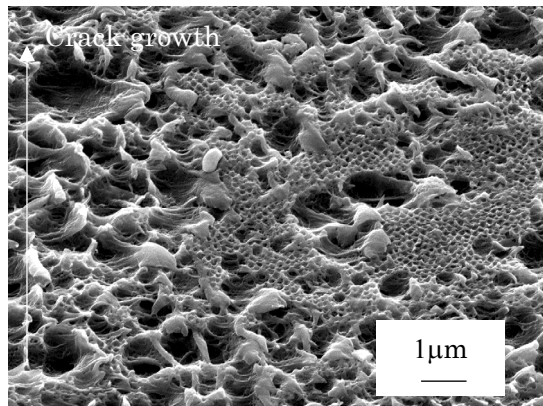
Fracture surface of Si-MT in Fiber-rich area (Al side).
